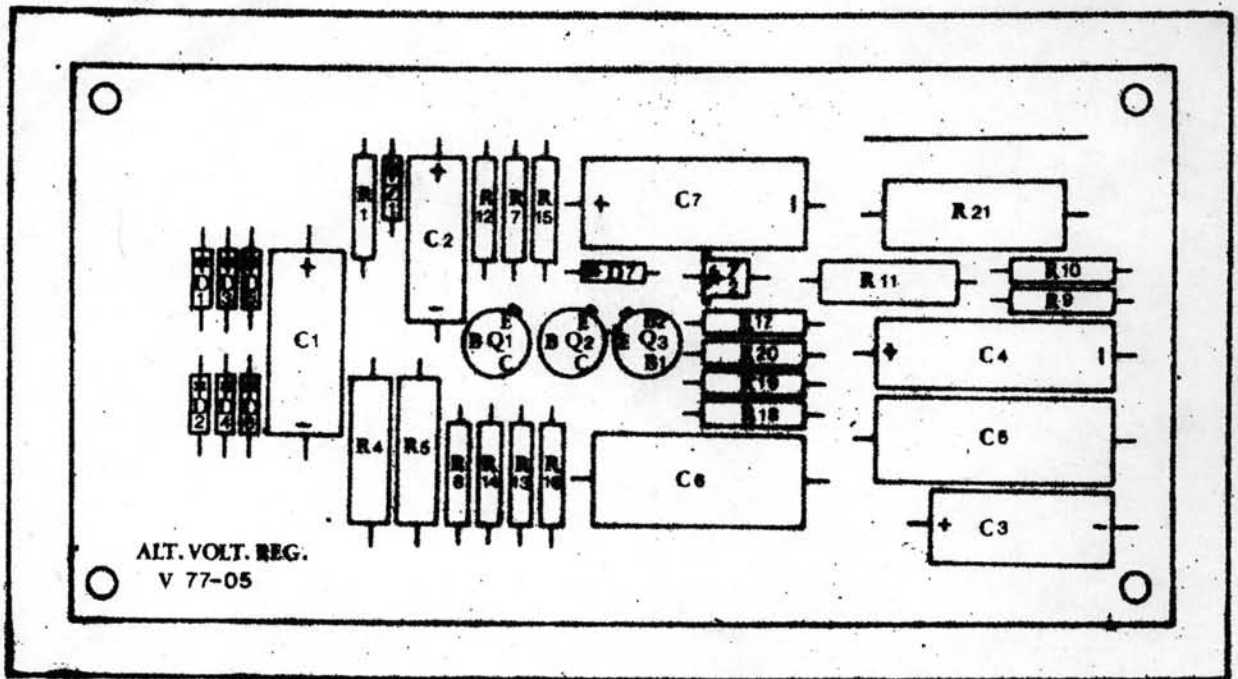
Layout of Components on the Printed Circuit Board.
